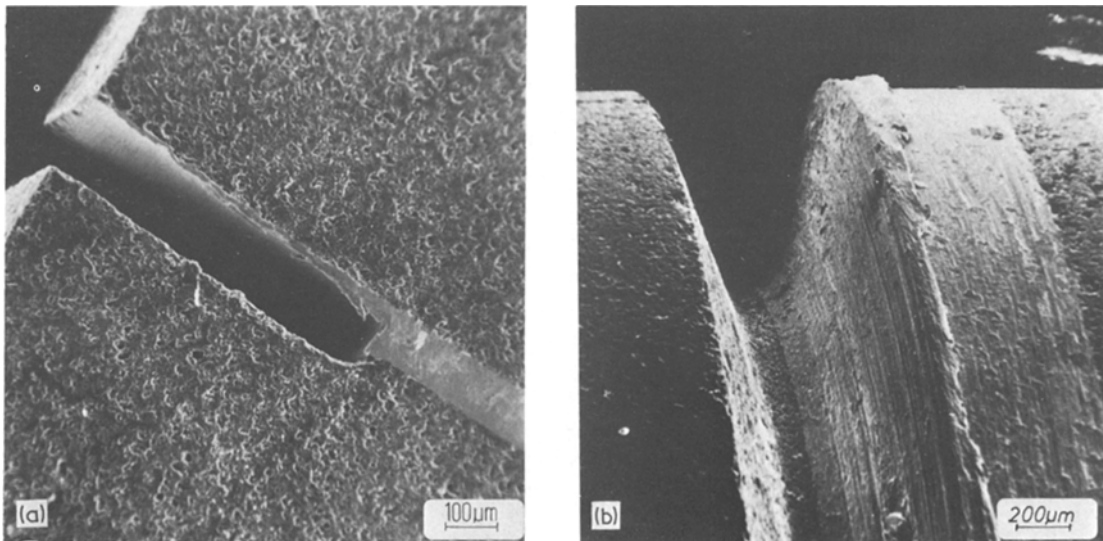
Notches at the ceramic-to-metal interface for (a) bend test, and (b) tensile specimens.
